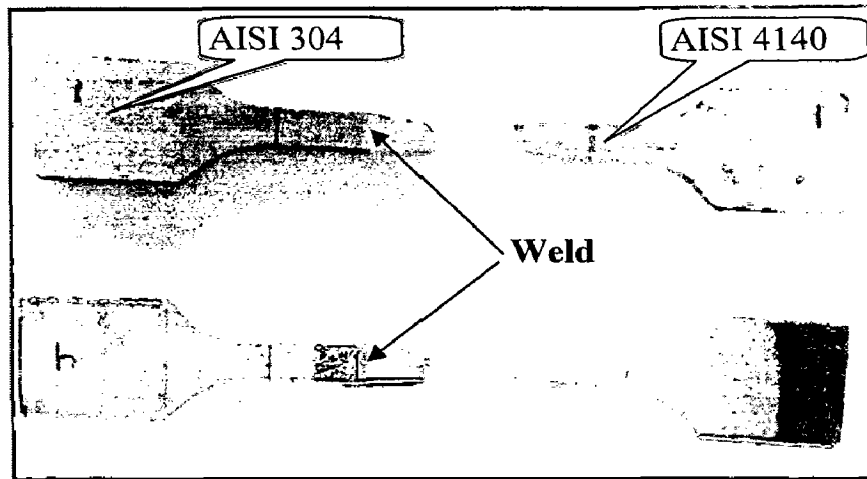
Photograph for tensile fractured weldment made by EBW
